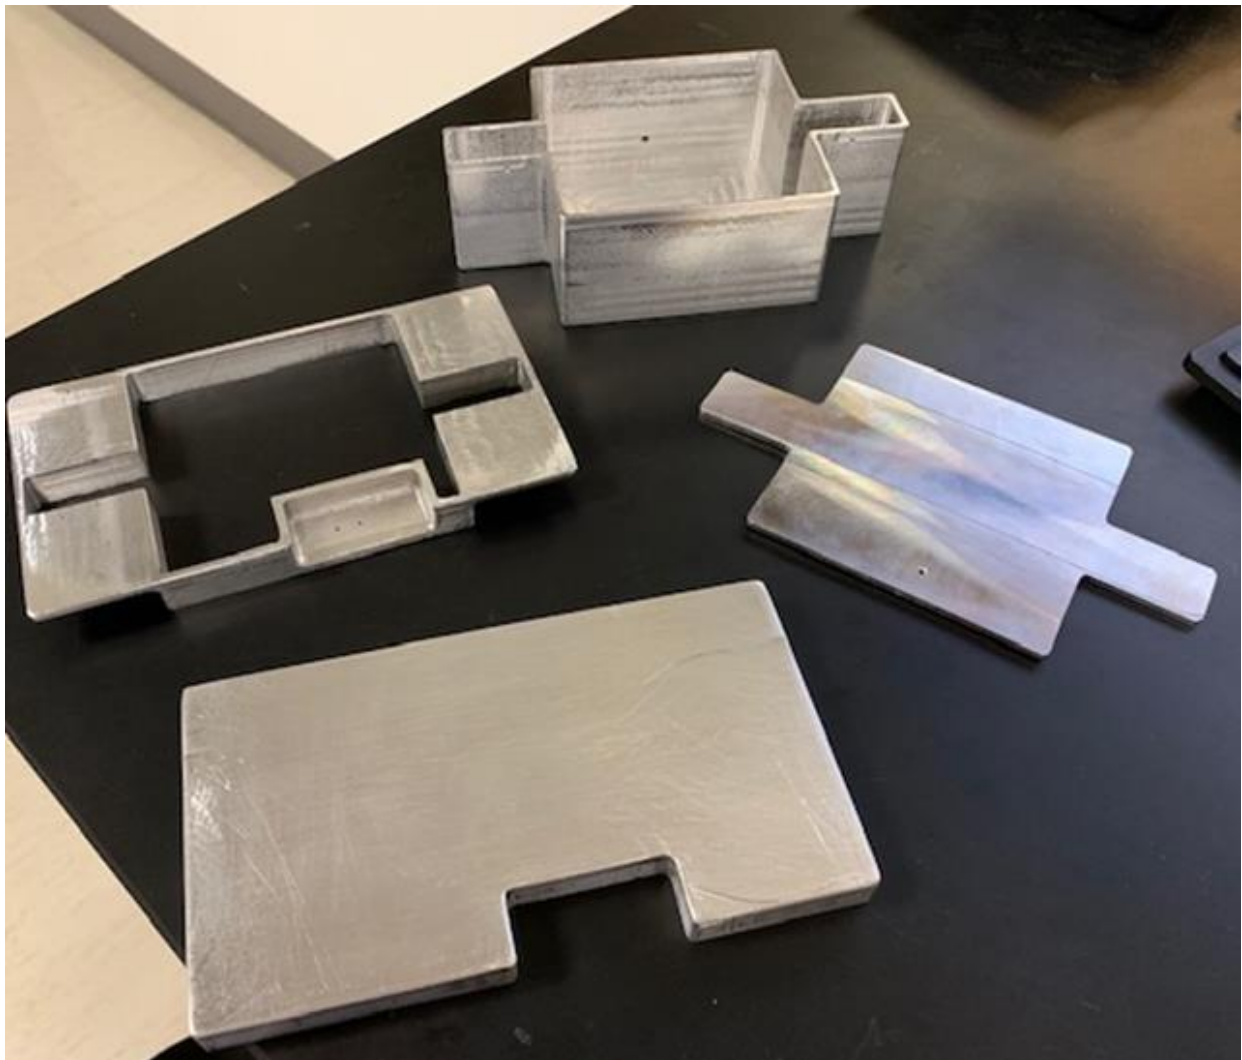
Horizontal Design was Conventional Machined in four Pieces
